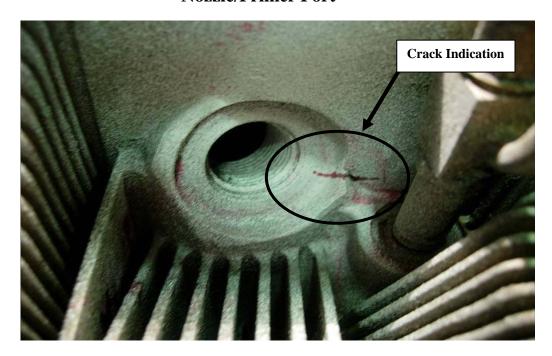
Cylinder Head Crack Indication with Dye Penetrant
